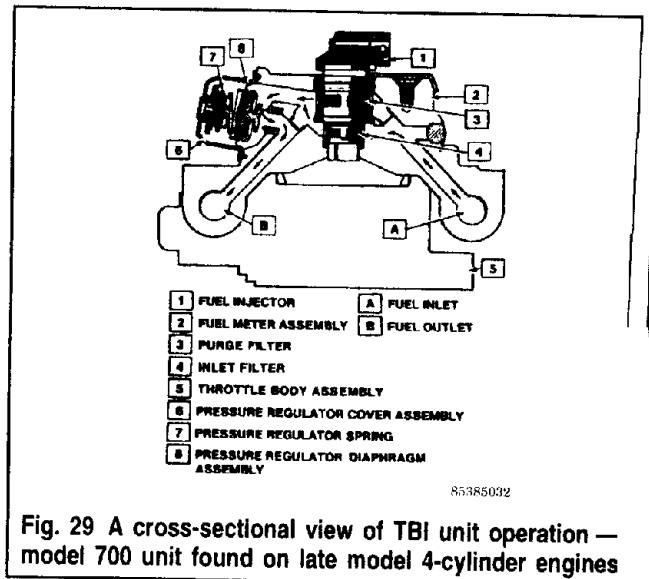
A cross-sectional view of TBI unit operation — model 700 unit found on late model 4-cylinder engines
